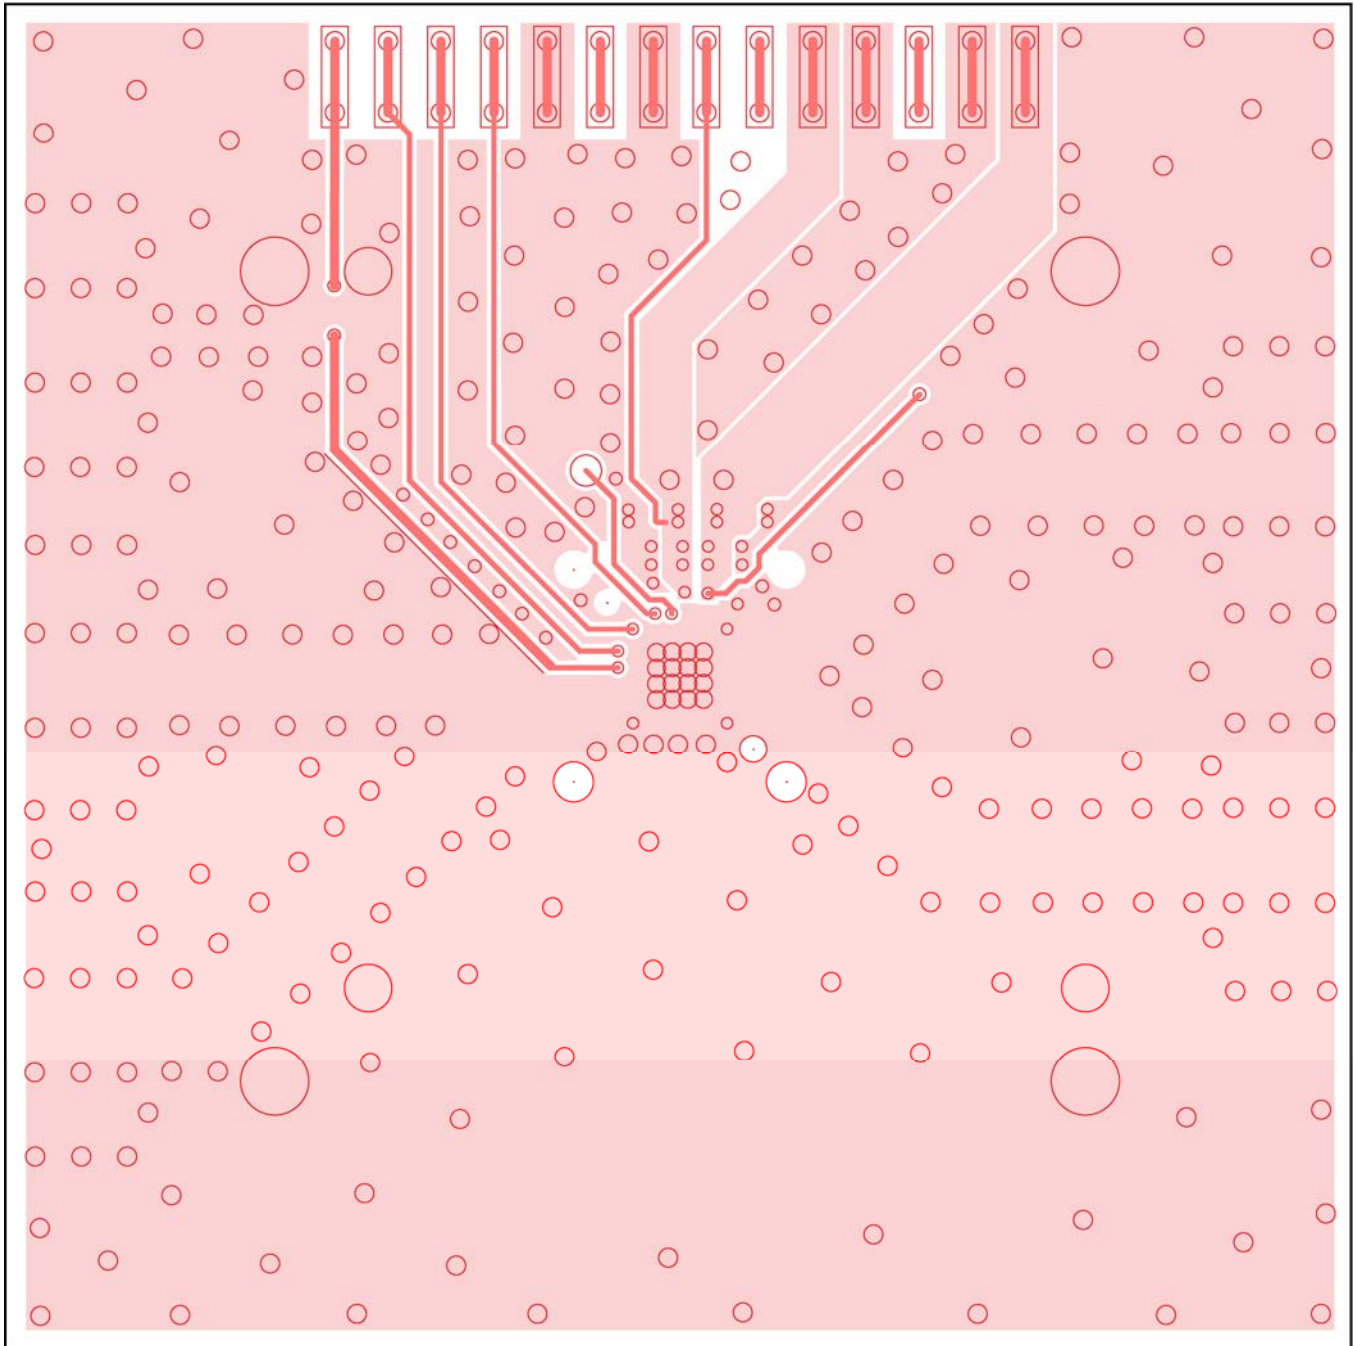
SKY77344-21 Power Amplifier Test Fixture PCB Layer 2
